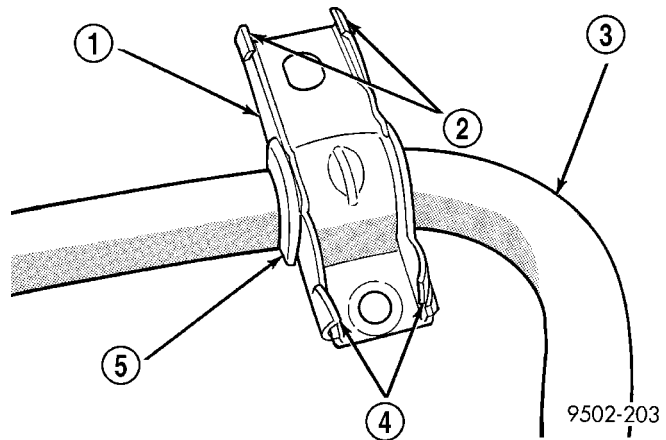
Stabilizer Bar Bushing Retainer Attaching Bolts
